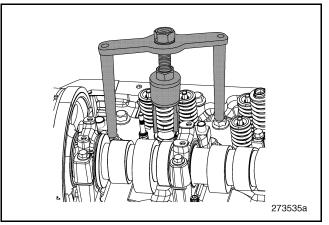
Removing Injector with Heavy-Duty Puller (Tool No. J 48922)
